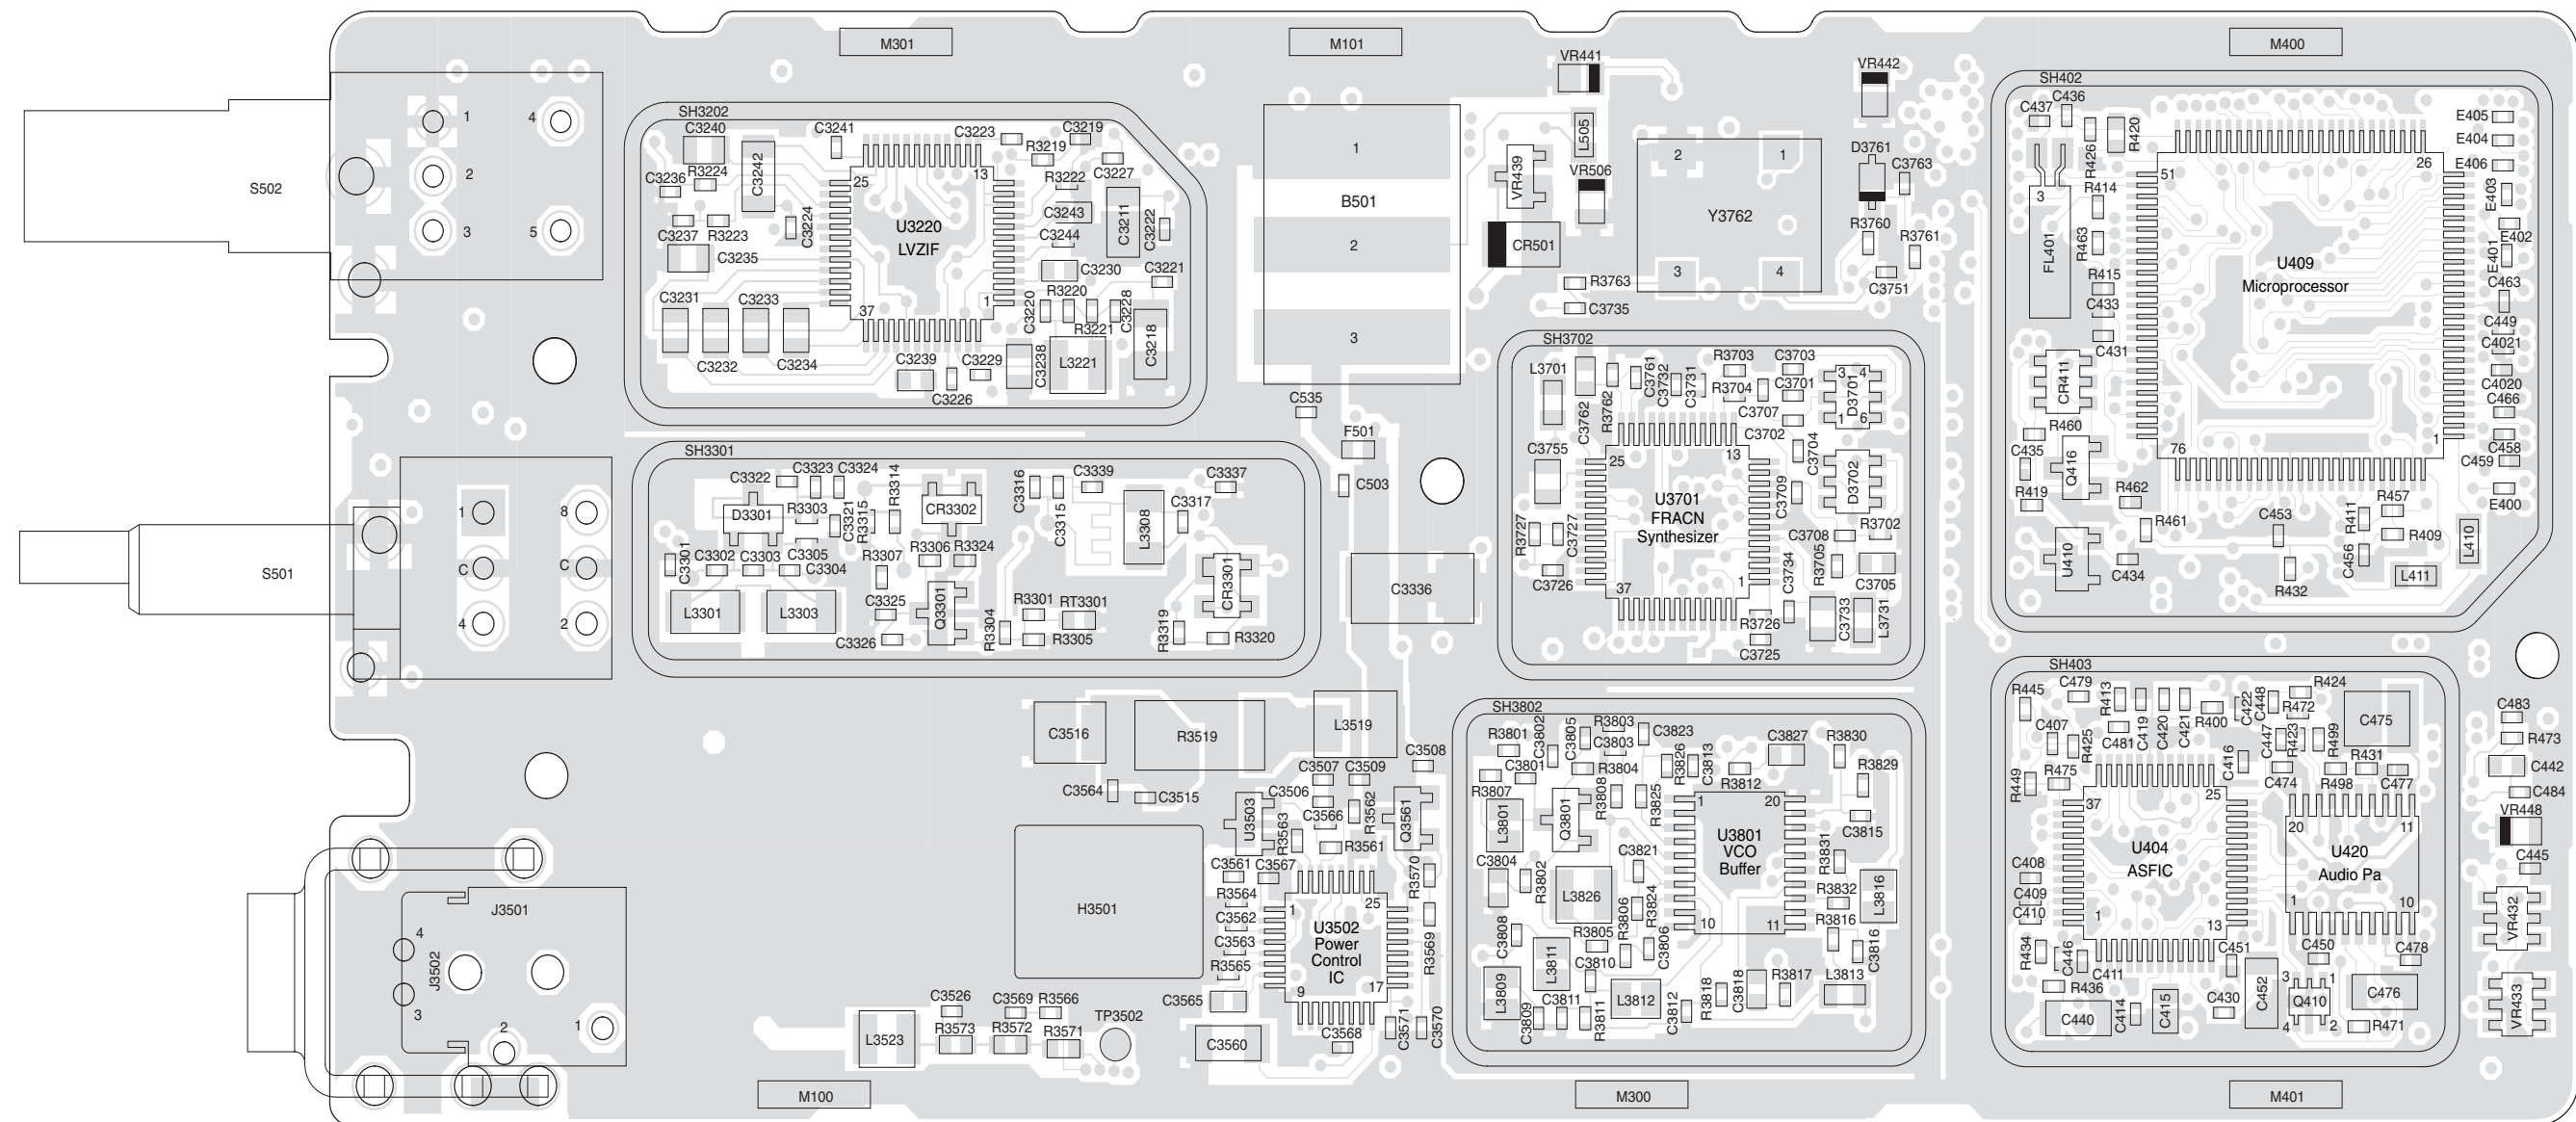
VHF (136-174MHz) 5000/7000 Series Main Board Top Side PCB 8486062B12
